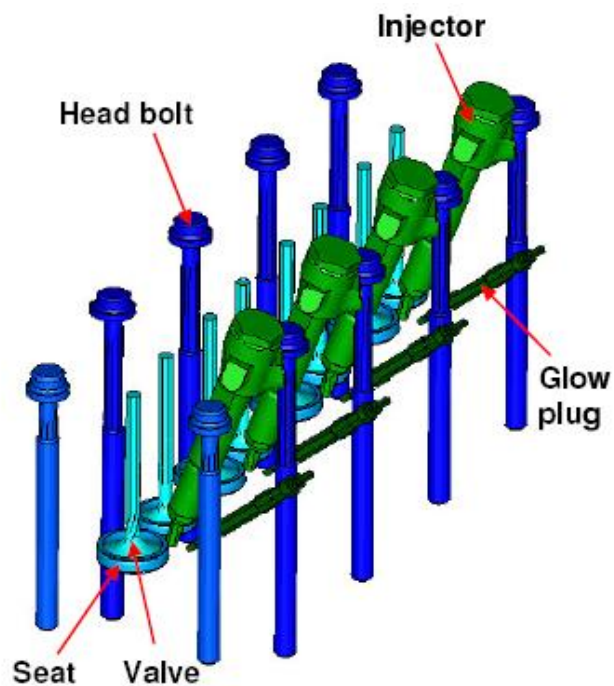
Multiple instances of valve, seat, injector, glow plug and head bolt.
